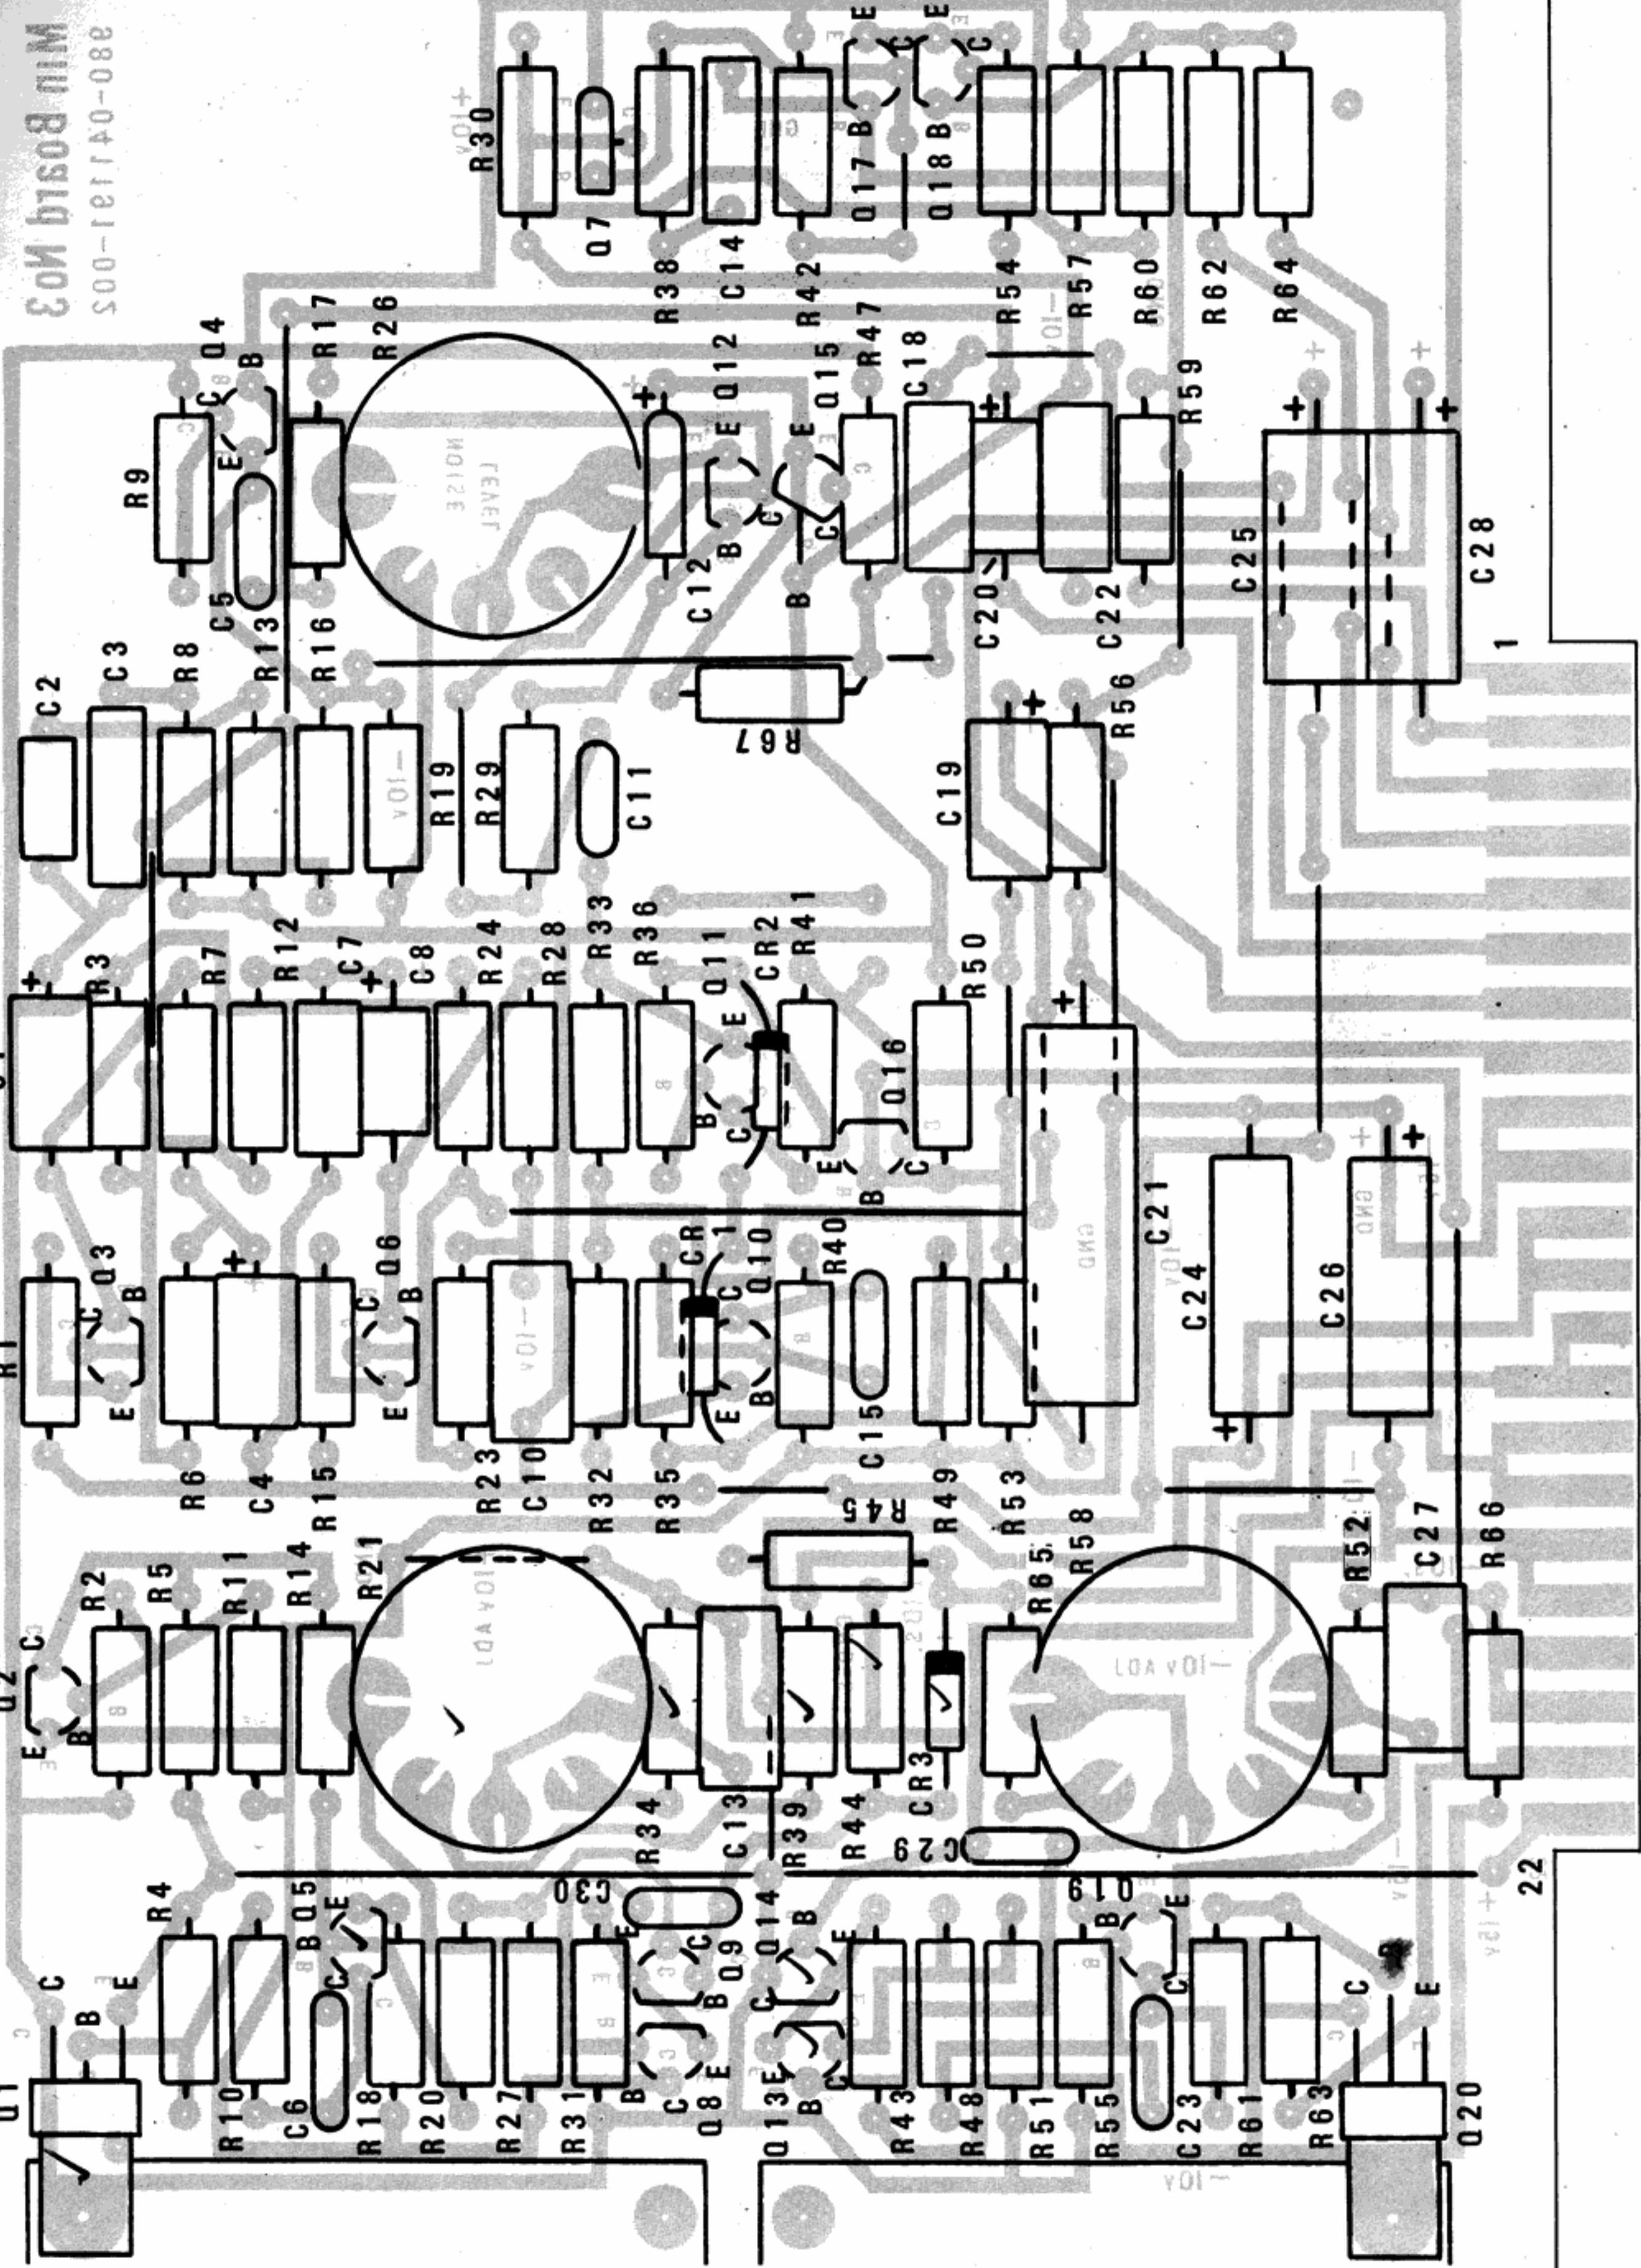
POWER SUPPLY PRINTED CIRCUIT BOARD NO. 3 ASSEMBLY
